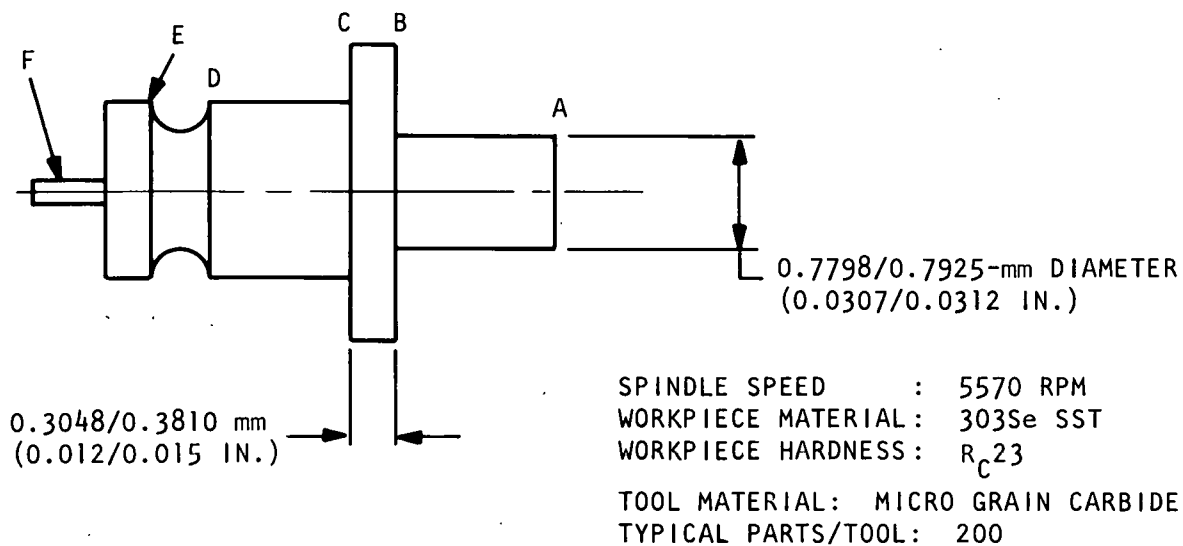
Miniature Precision Part Produced on a Chucker Lathe
